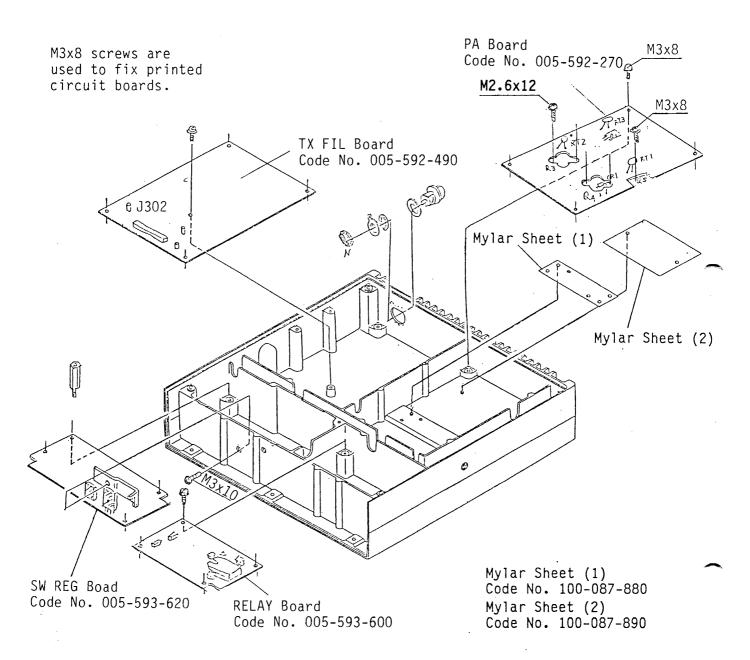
Disassembly of P.C. Boards from Top Chassis
